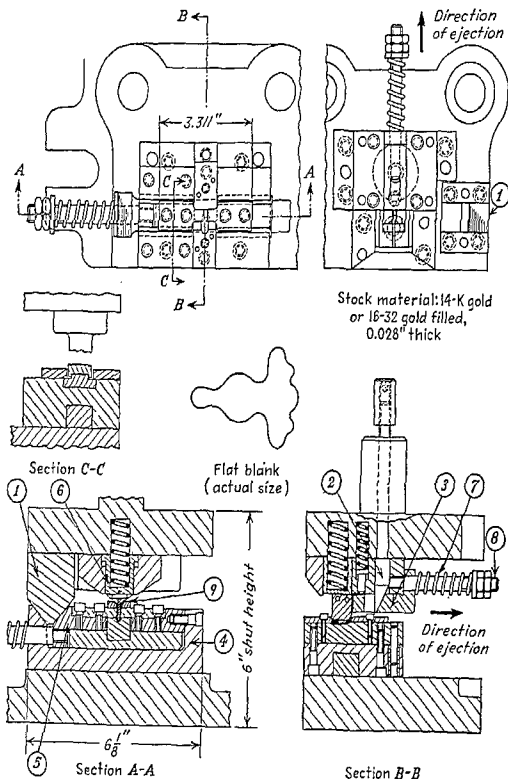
Single-cam double-slide forming die. (Harig Mfg. Corp.)
